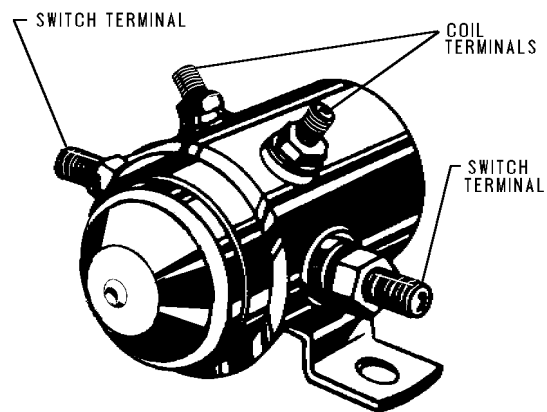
MAGNETIC SWITCH ASSEMBLY <sup>92052</sup>
